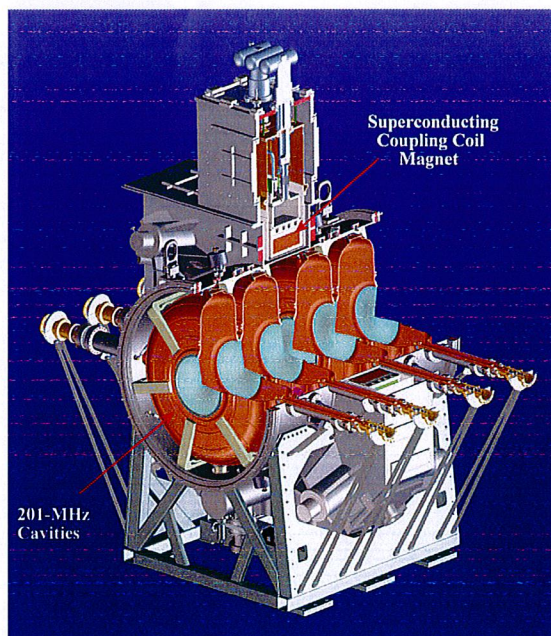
90° sectioned view of the MICE cooling channel RFCC module.
